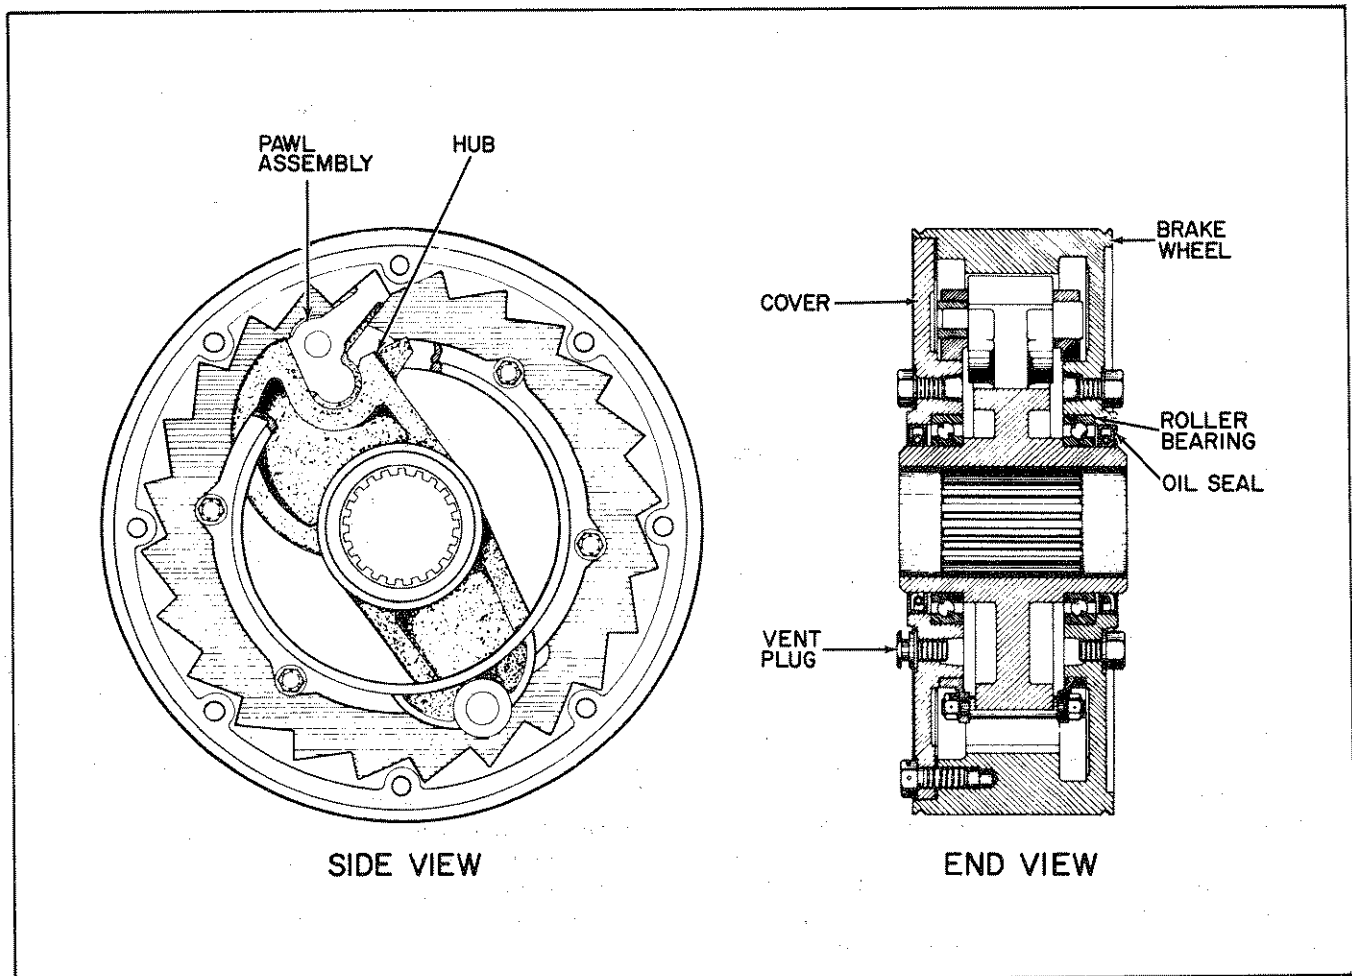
Direct Drive Automatic Brake Assembly (Optional)
